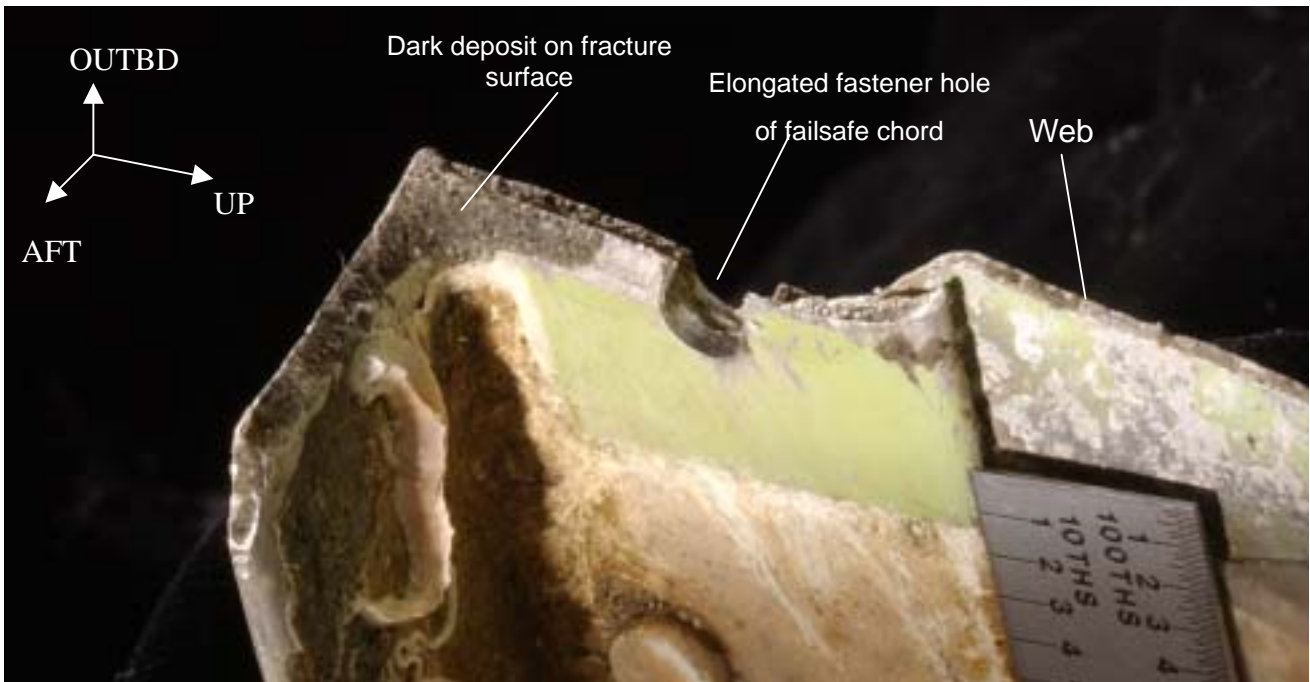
Fracture surface of failsafe chord and web common to S-49L of the STA 2060 frame segment.
